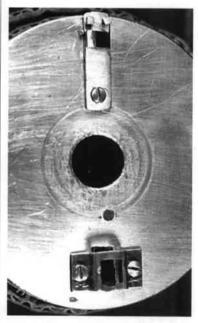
Treble end of Lecoultre 29254 cylinder. Two adjusting screws on the snail cam follower and an extended slot for the drive pin.
